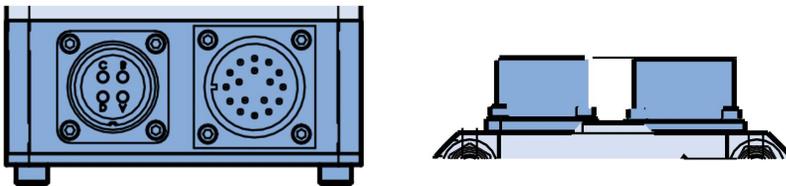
Drawing of box mount connectors used on some ServoWeld actuators.
